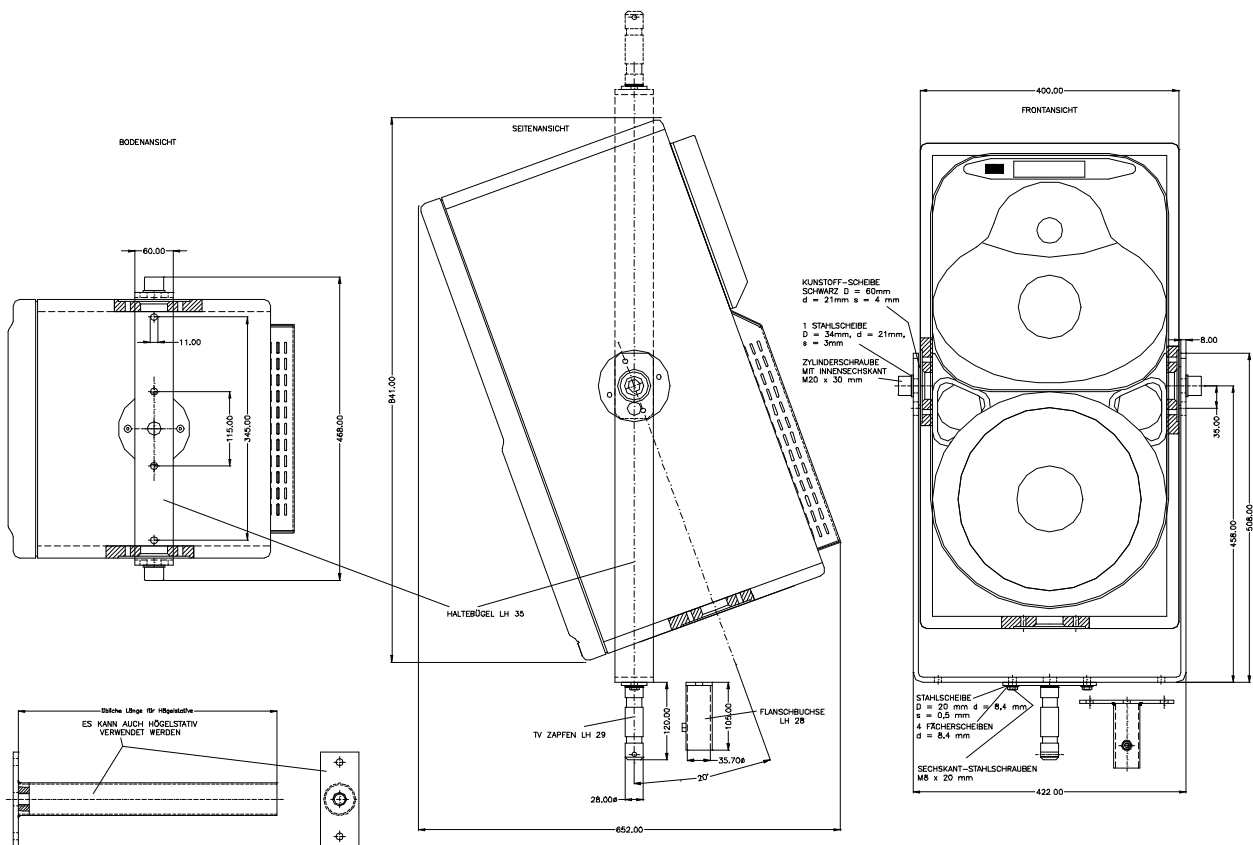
/3: Fixing holes for mounting LH 35 bracket
